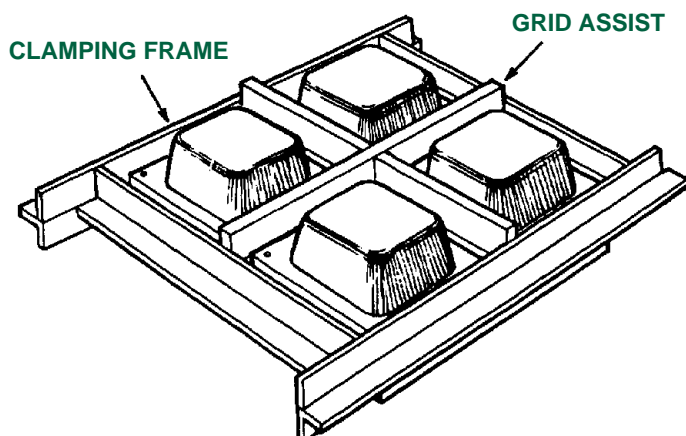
MULTIPLE PART DRAPE FORM MOULD
